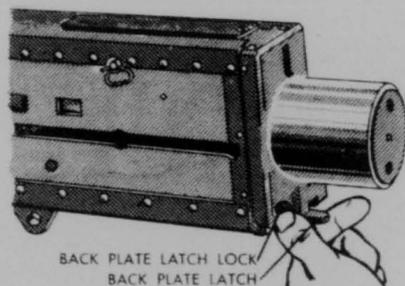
Disengaging Lock and Latch Preparatory to Removing Backplate.
